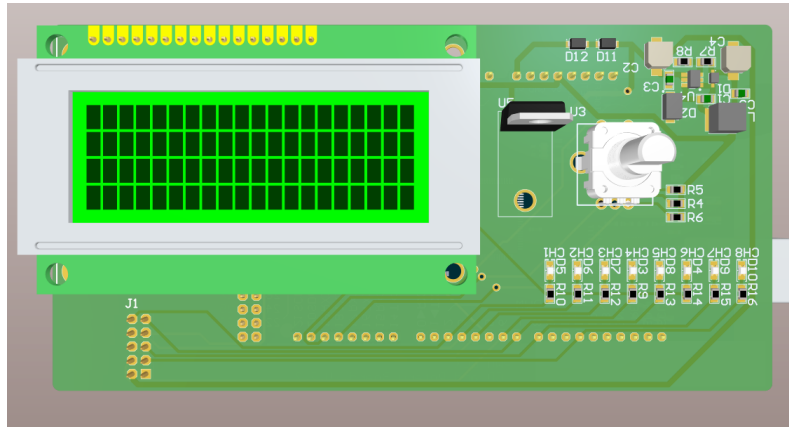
Printed Circuit Board (PCB) 1 top view
